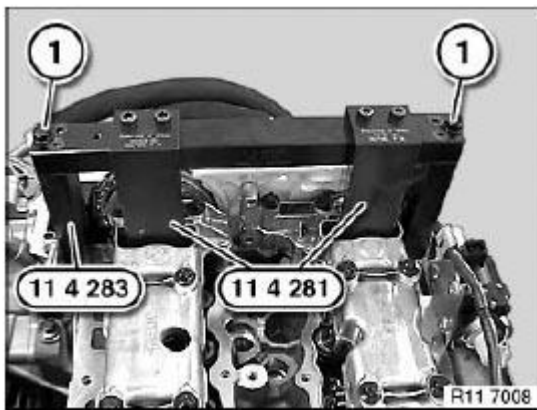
Identifying Special Tools (11 4 281) And (11 4 283)
